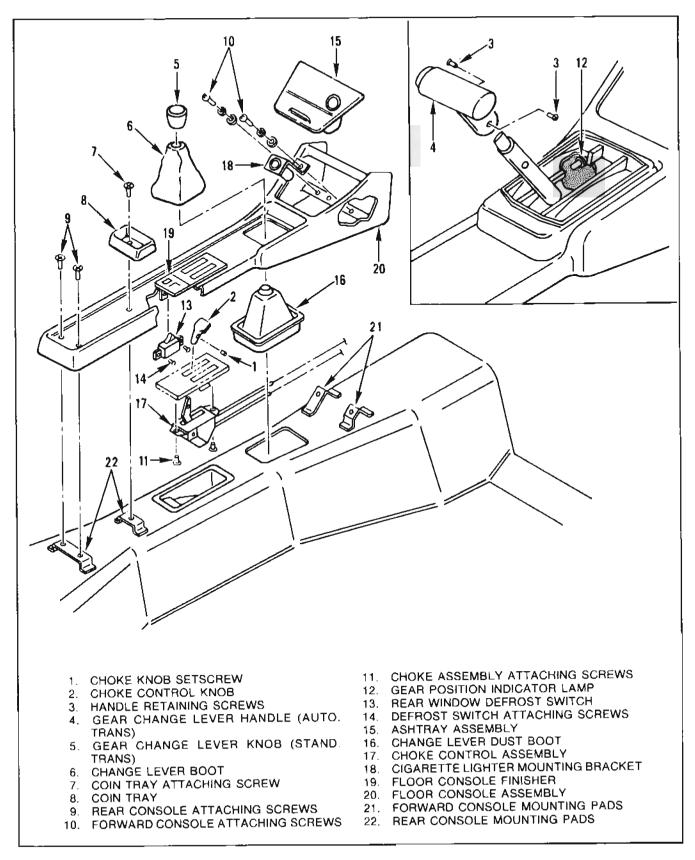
Floor Console and Attaching Hardware (Exploded View)
